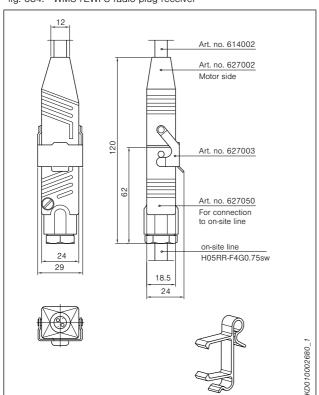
Plug-in connector and plug-in connector holder with integrated cable hook.
